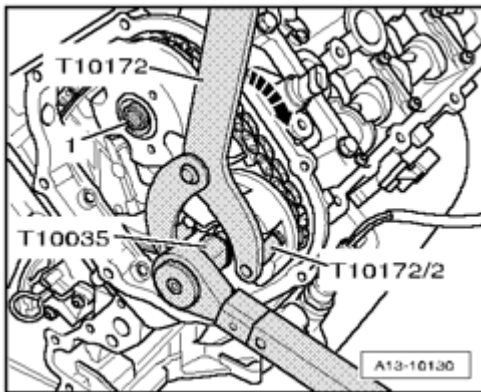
Setting Counter-Holder T10172 With Pin T10172/2 In Place On Camshaft Adjuster Of Right Exhaust Camshaft
